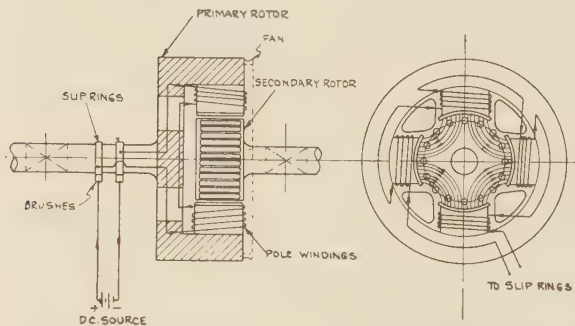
COMPONENT PARTS OF TYPICAL ELECTROMAGNETIC-SLIP COUPLINGS
